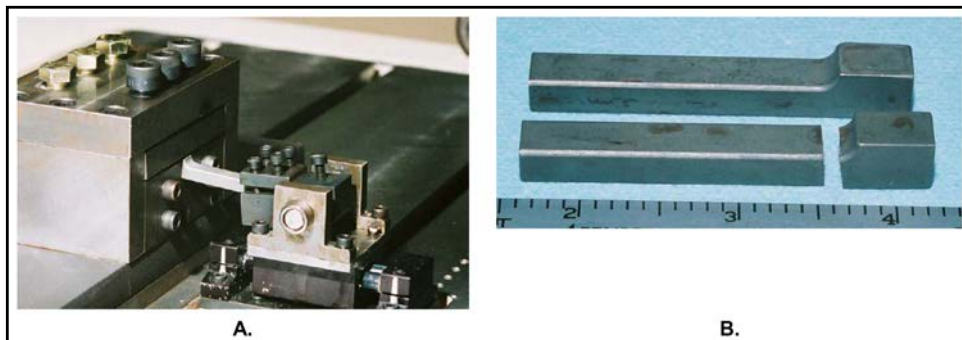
Bruggen test machine setup (A) and as-manufactured-and-tested to failure specimens (B).
